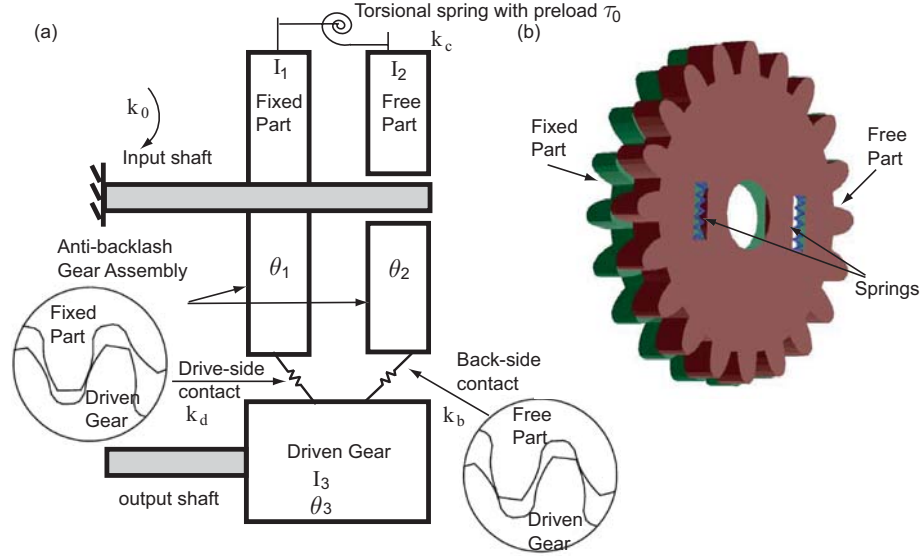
A lumped parameter model for anti-backlash gears: (a) front view of the whole system (b) side view of the anti-backlash assembly.
